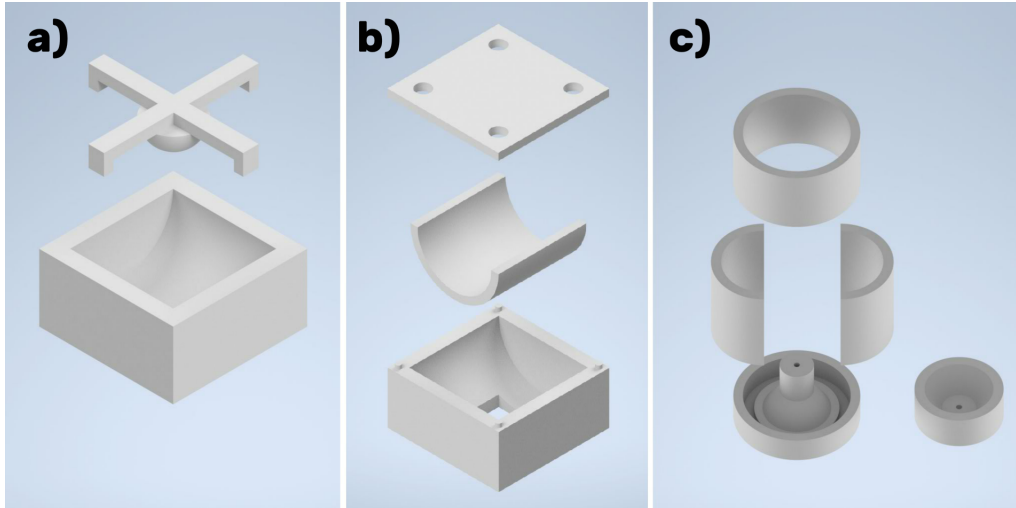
Three mold designs were tested. a) Mold A consisted of a main frame and a cross-shaped support structure in order to shape the ventricle. b) Mold B converted the cross-shape to a flat lid and added a thin U-shaped plate to make it easier to remove the solidified silicone. c) Mold C utilized a different strategy where the whole silicone cylinder was cast in one procedure, except for the top which was cast separately, shaped as a conical frustum.
